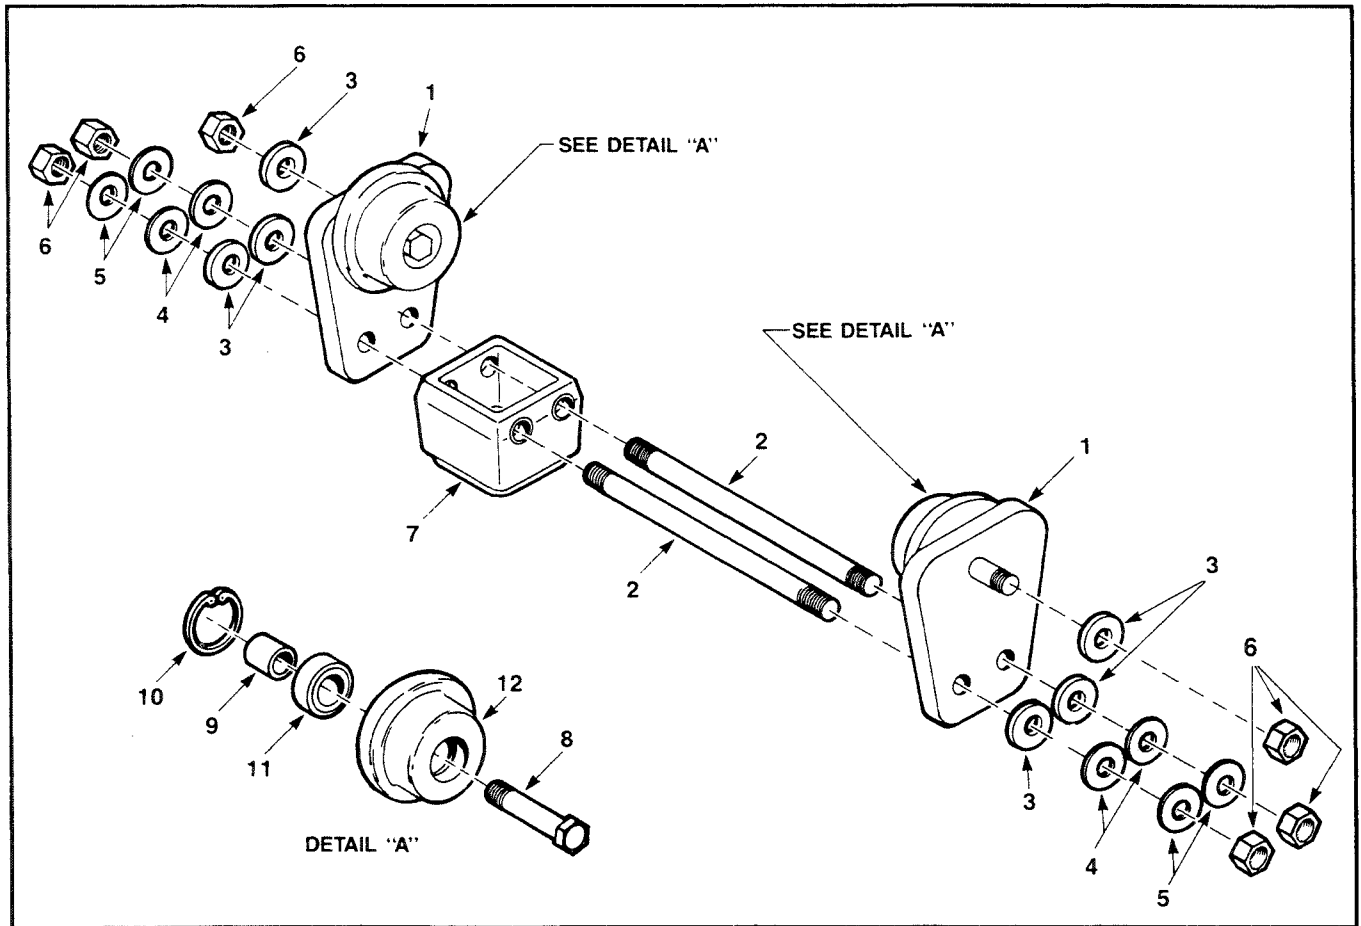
B. TROLLEY GENERAL ASSEMBLY
